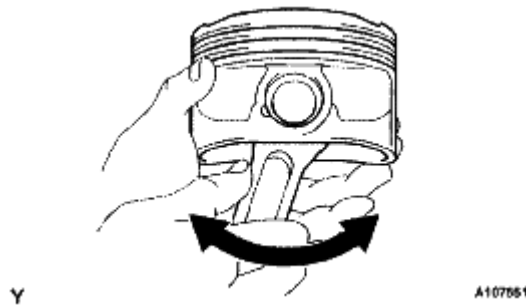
Checking Fitting Condition Between Piston And Piston Pin
